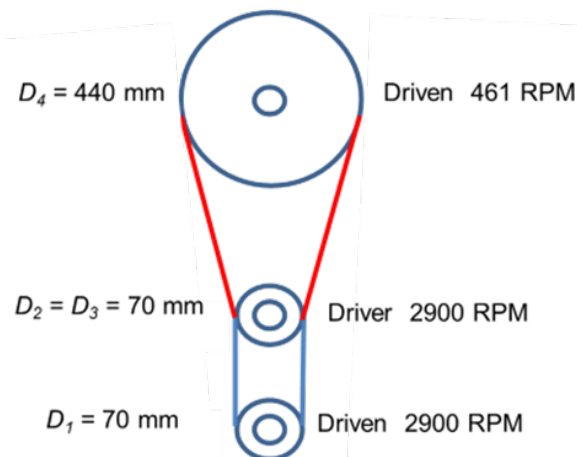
Pulley-belt arrangement (Speed reduction gearbox 1:36).
